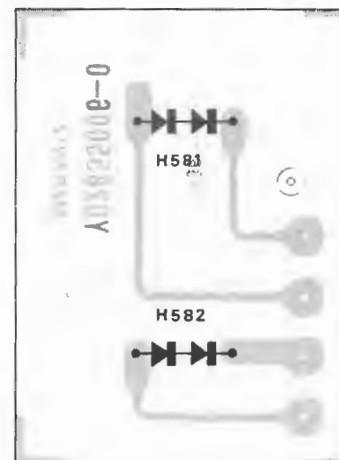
Loudness, Hi-Filter and Speaker Switch Unit Assembly
